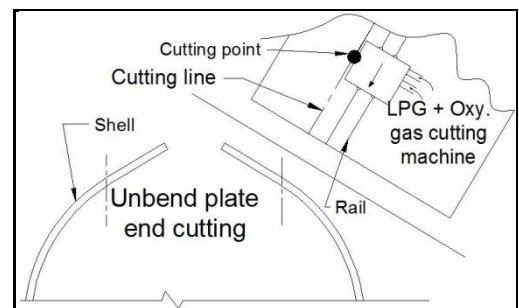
Shell's edge cutting by LPG + Oxy gas cutting machine
